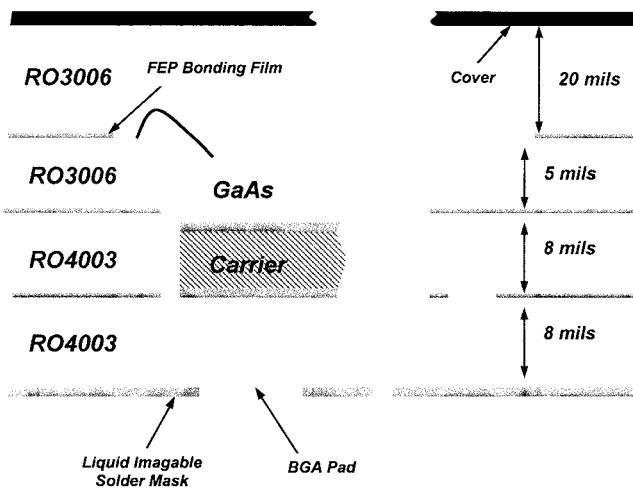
Layer stack-up of the multilayer laminate BGA package showing the MMIC cavity.
